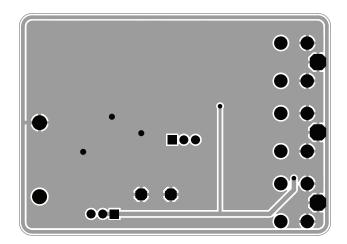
AAT3195 Evaluation Board Bottom Side Layout.
